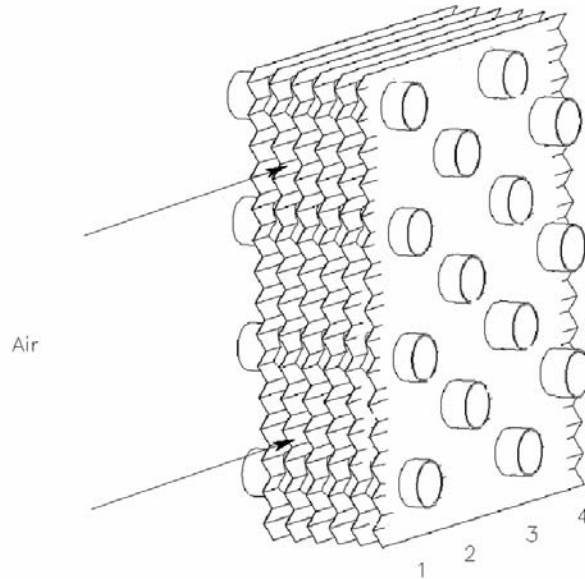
An enlarged cutaway view of a plain 4-row coil
